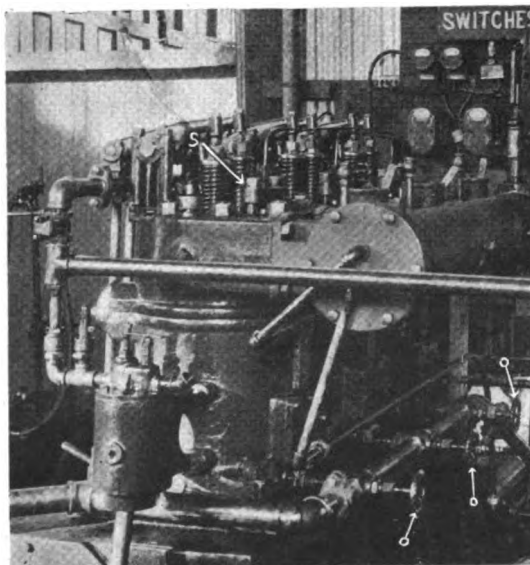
Forward view of Enterprise Diesel-engine showing valve operating-mechanism and air-pump
